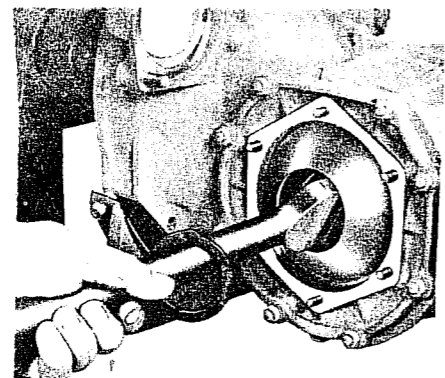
Withdrawing the axle shaft. - Swing axle.
